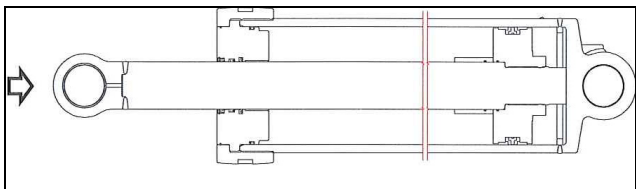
Rod Assembly Installation (Tower Lift Cylinder)
